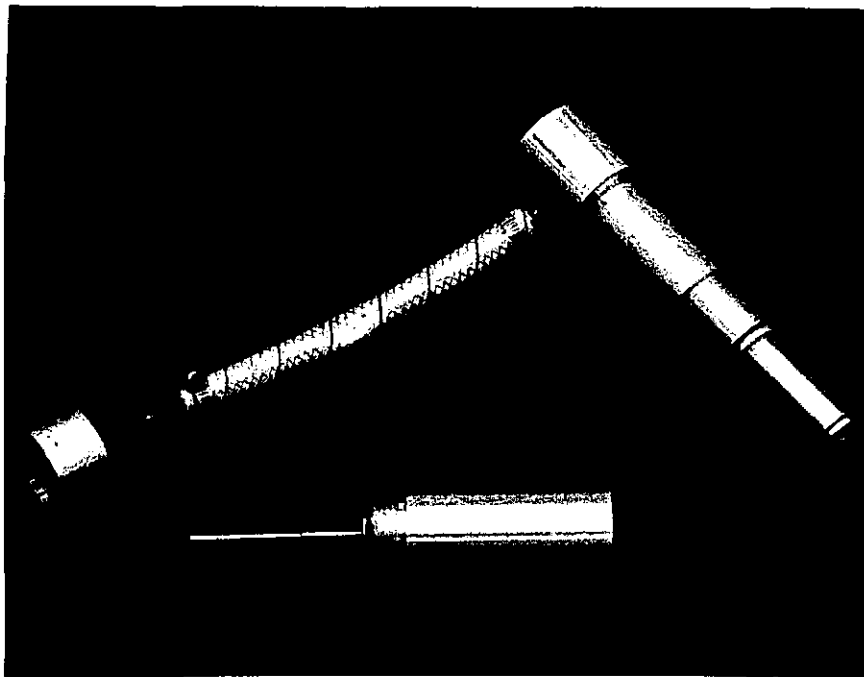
Prototype of damper design using telescoping cylinder with remote metering pin orifice.
